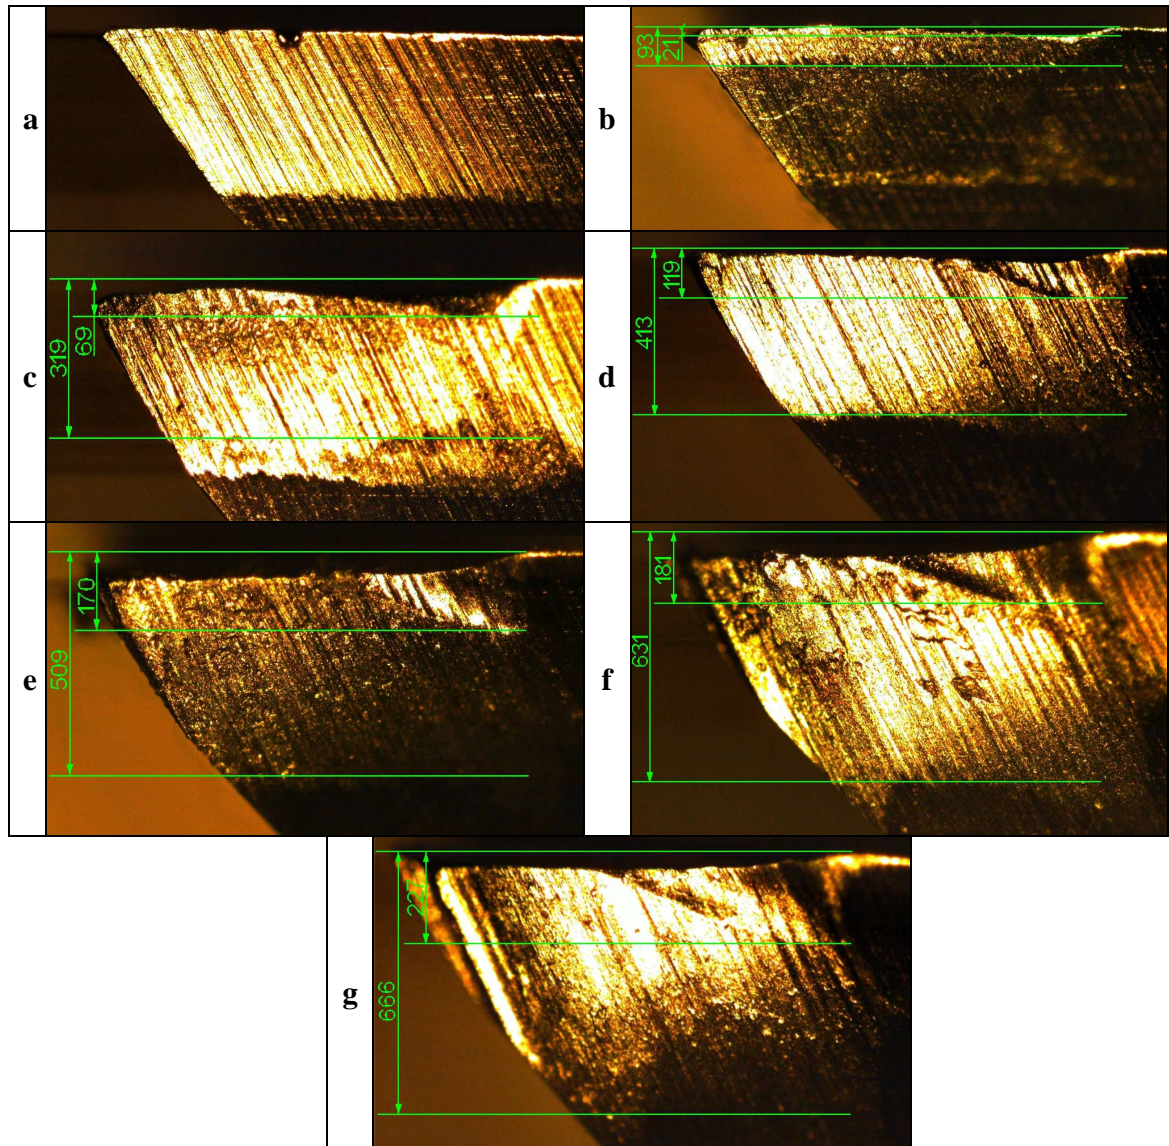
MTE 9mm end mill tooth # 4 trochoidal toolpath clearance face wear a) Fresh tool, b-g) After pass 1-6 (each 54 mm length, 27 mm width, 1 mm depth).
